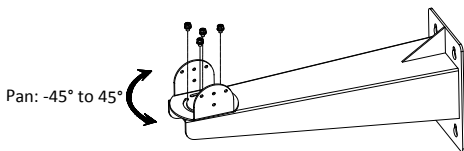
Screw the PT Joint to Wall Mounting Bracket
